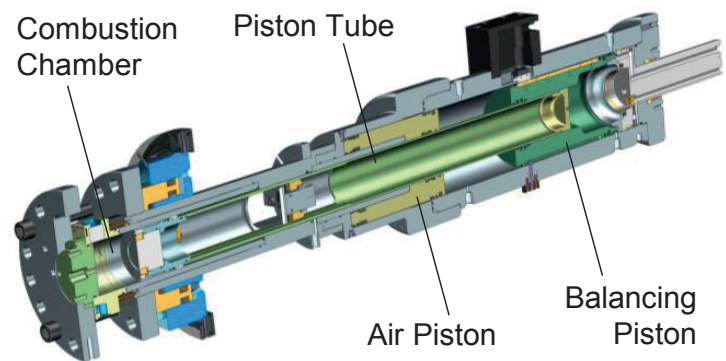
Cross-sectional view of the rapid compression-expansion machine.
